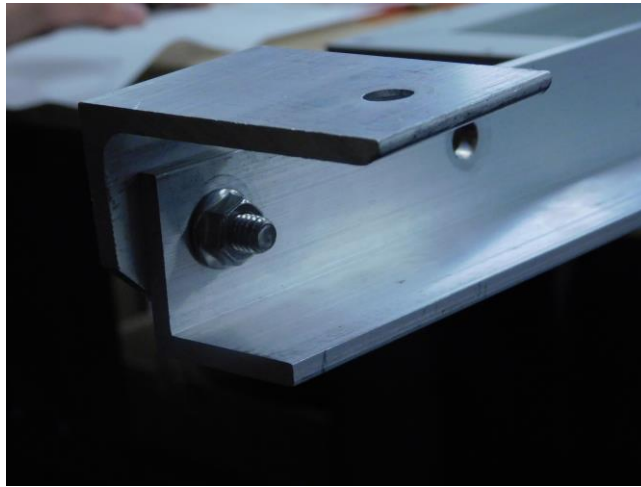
ATTACHING THE FOOT BRACKET TO THE END OF THE ADJUSTMENT BRACKET
